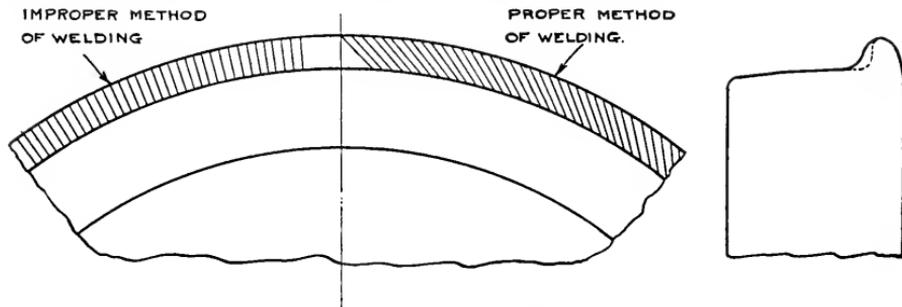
Sketch showing Proper and Improper Method of Welding Wheel Flange
